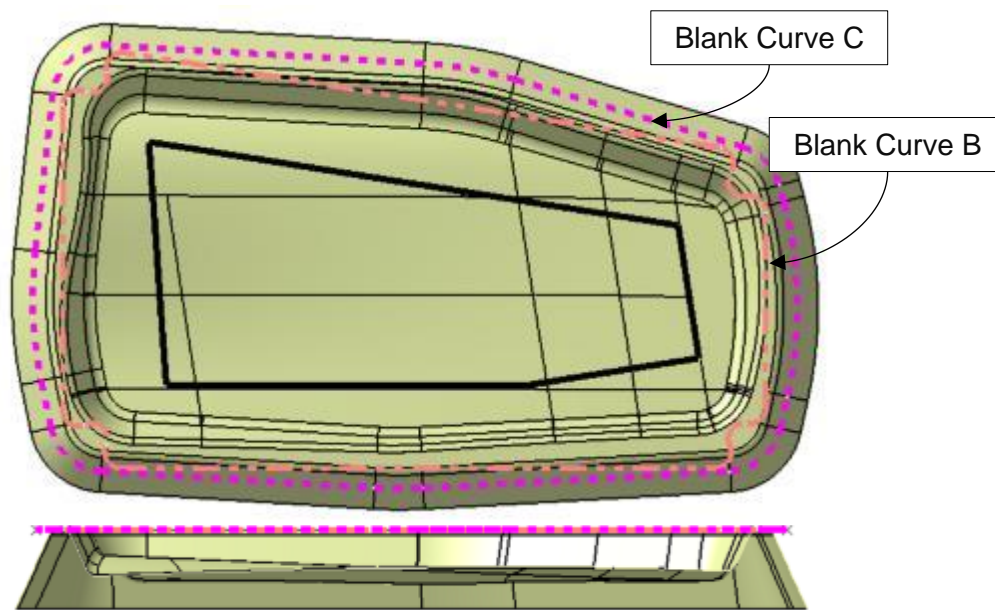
Concept-5 Tool B and Blank B & C – Top and Side Views
